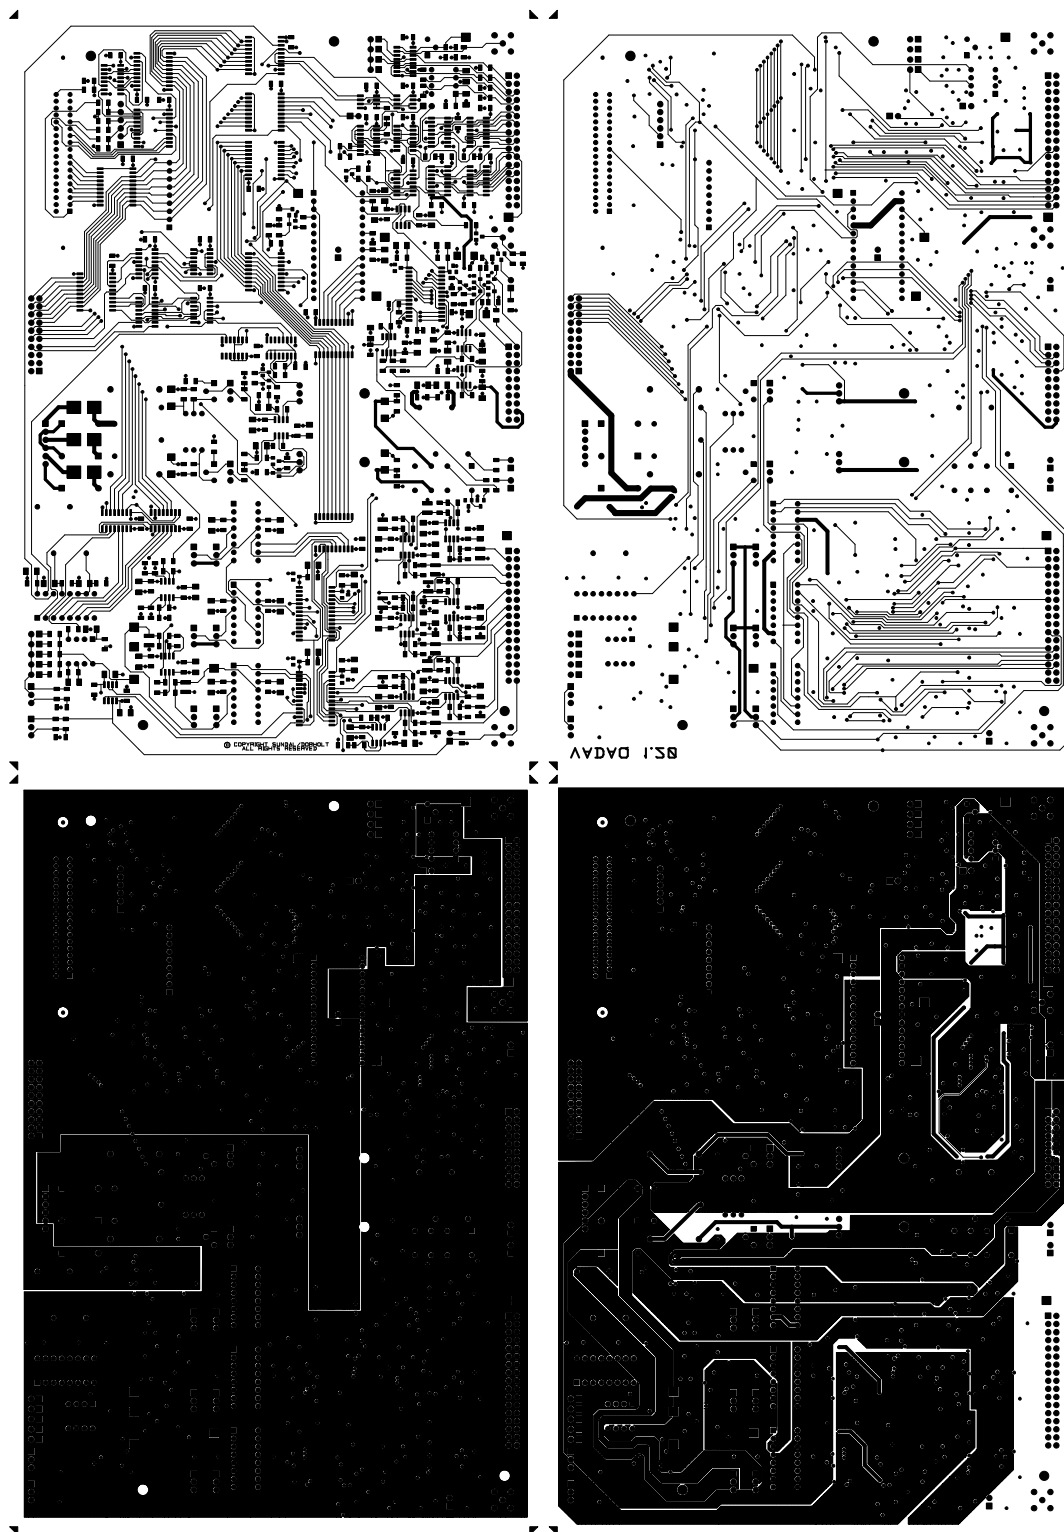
All 4 electrical layers of the VA-DAQ 1.20, showing from upper left to lower right: the top layer for component mounting, the bottom layer, the ground plane and the power plane.
